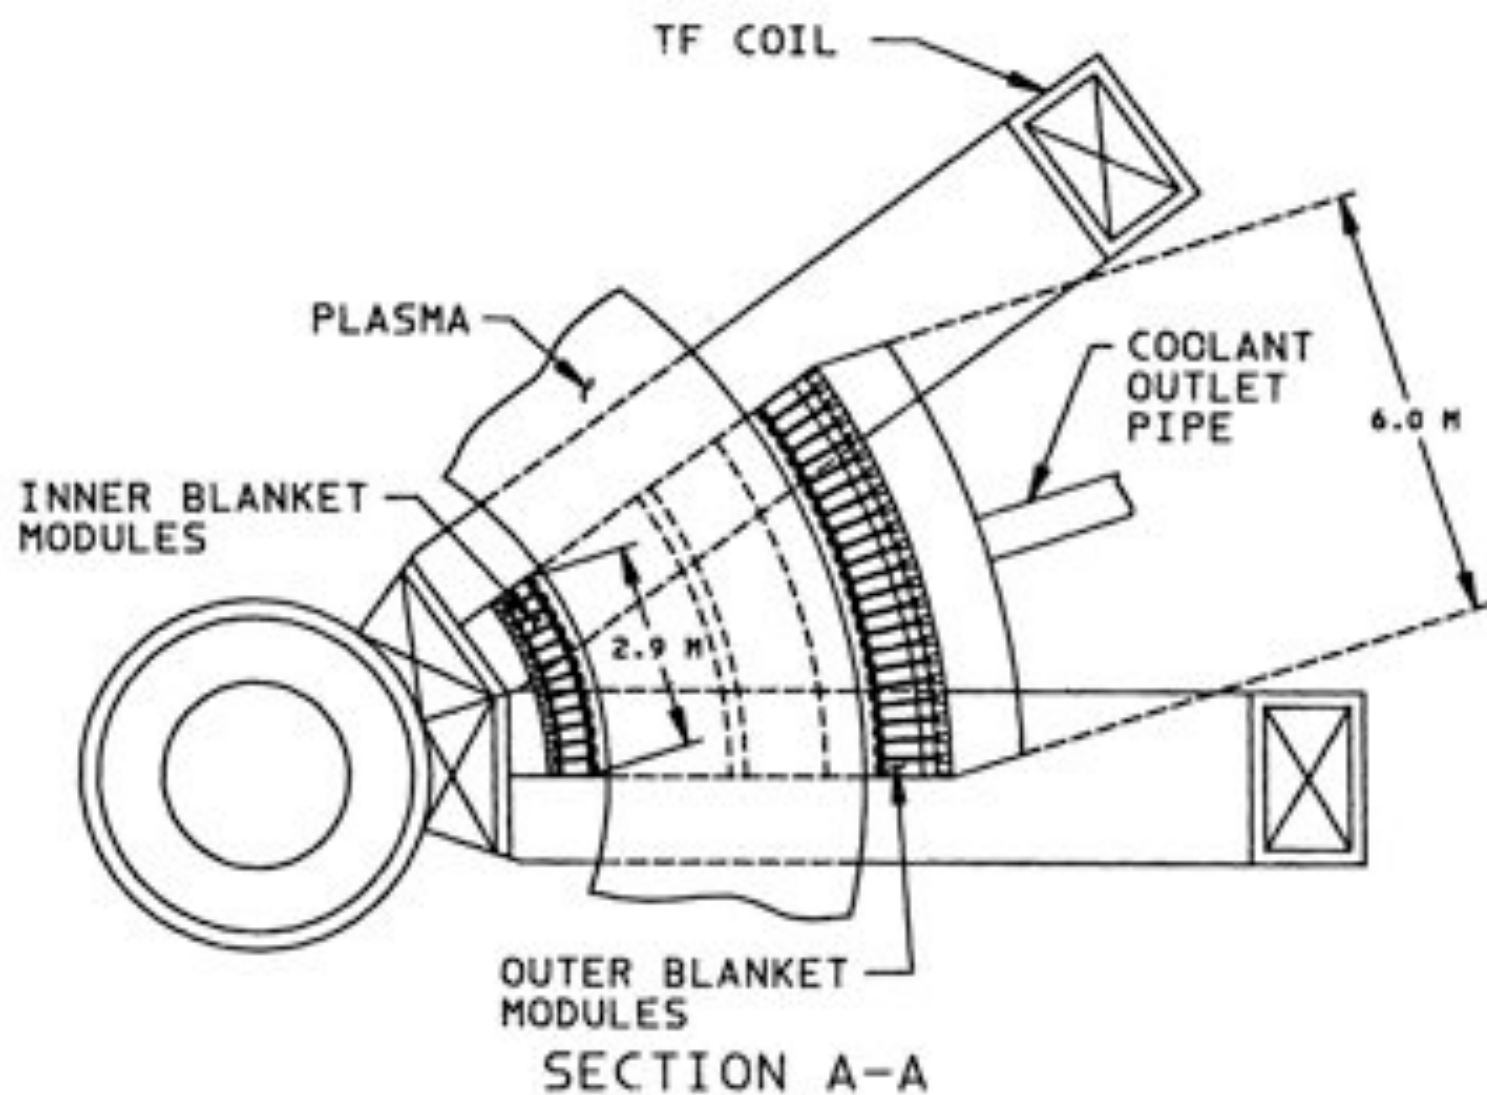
Top view of a Fusion Breeder Reactor sector showing section through horizontal centerline and lobe module arrangement.
